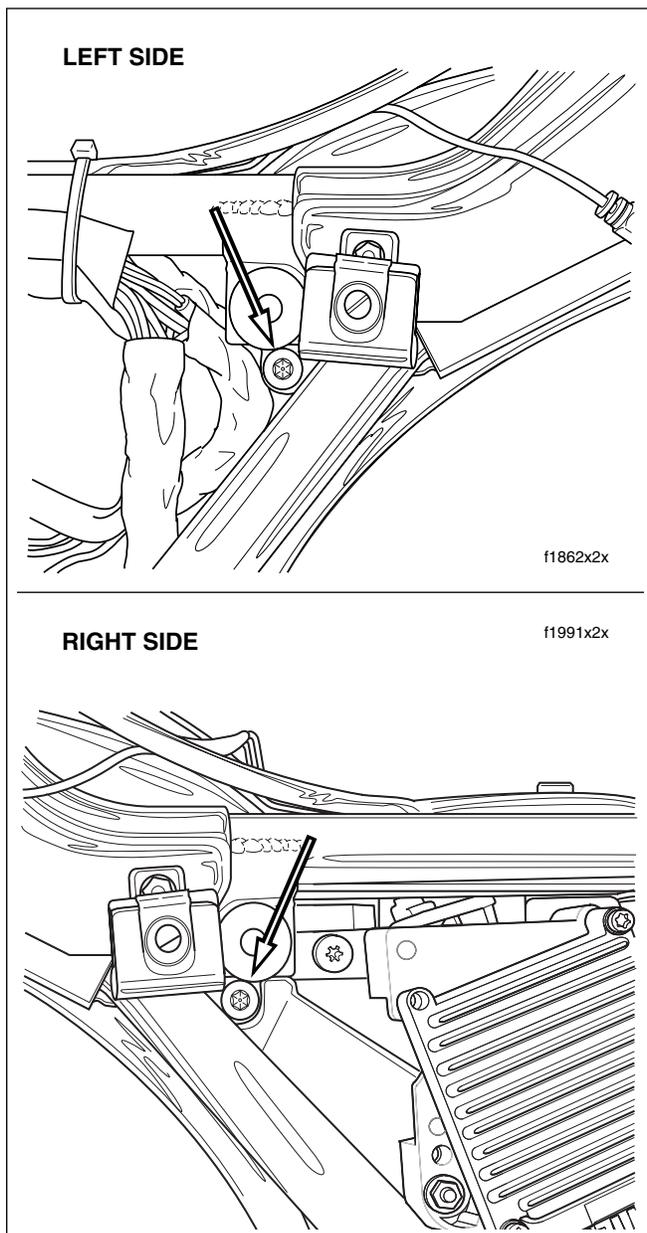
Fender Side Mounting Screws (T40 TORX)
